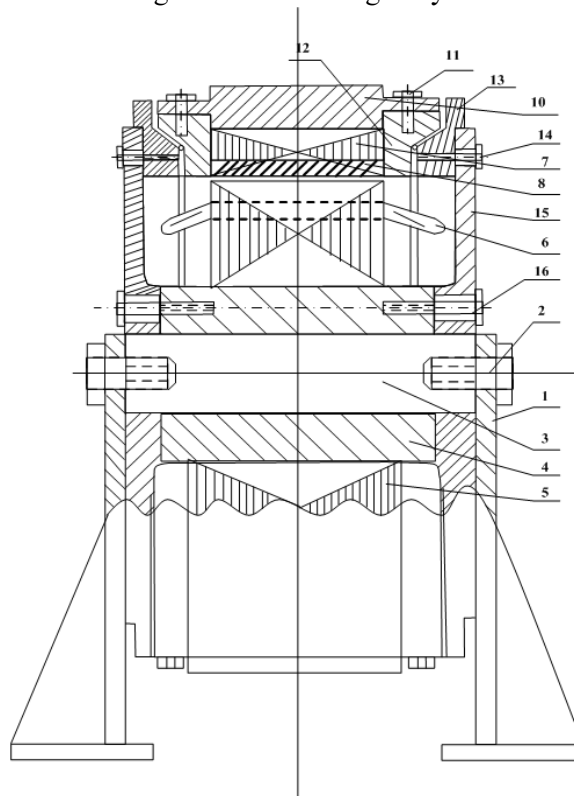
The electric motor of the fuel-handling machine working body of direct drive system
